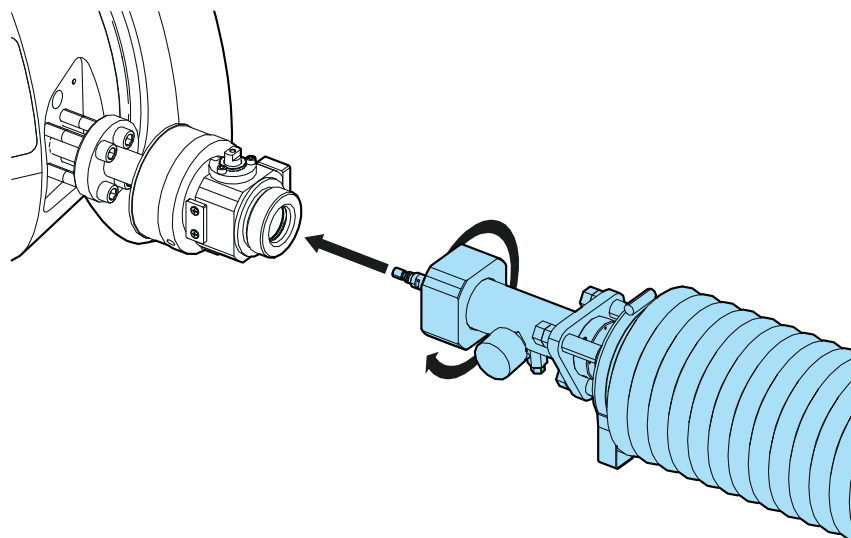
Mounting the spindle assembly with the ball valve assembly
